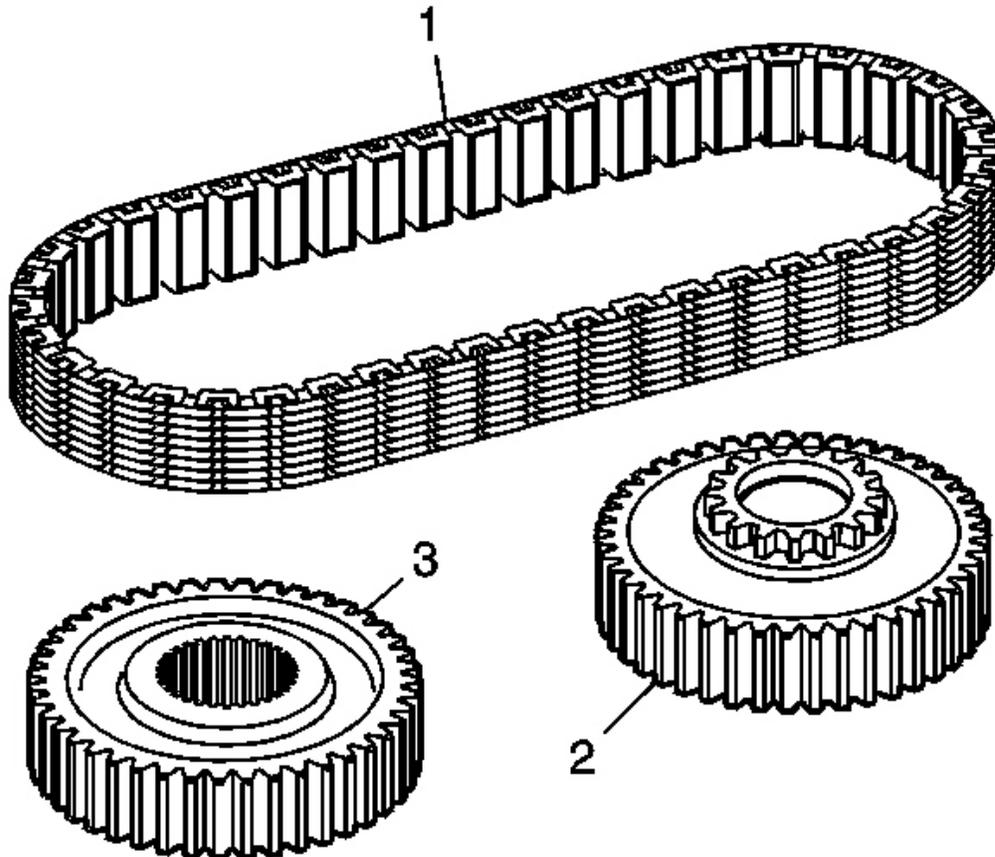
View Of Drive Chain, Drive Sprocket & Driven Sprocket
